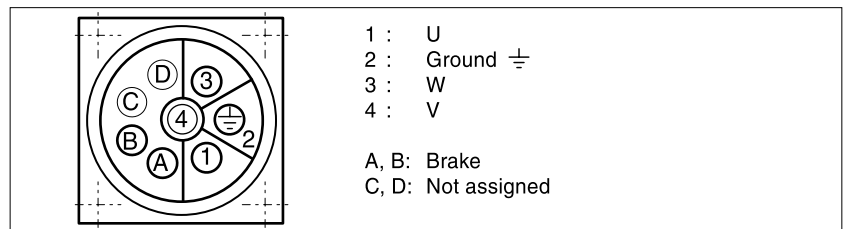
Connection of the motor cable to a SER or RIG motor (connector on motor viewed from plug side). For general arrangement of connector pinout for non-SER and non-RIG motors, contact motor manufacturer.
